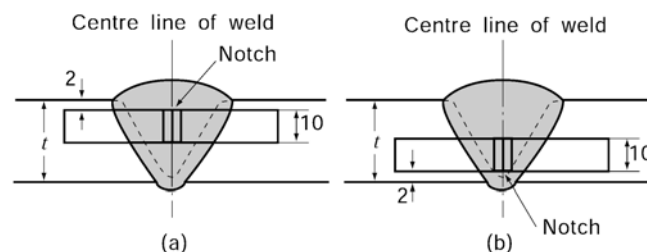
Position of Impact Test Specimen for Butt Weld with One-run and Multi-run Technique
